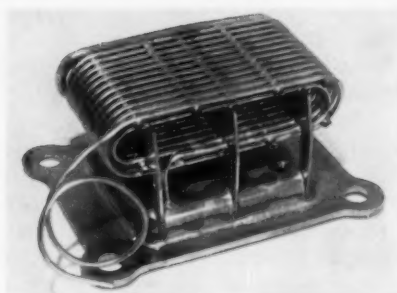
Coiled Tube Heat Exchanger of Type 304 Stainless Bonded With a Ni-Cr-Si Filler Slurry
